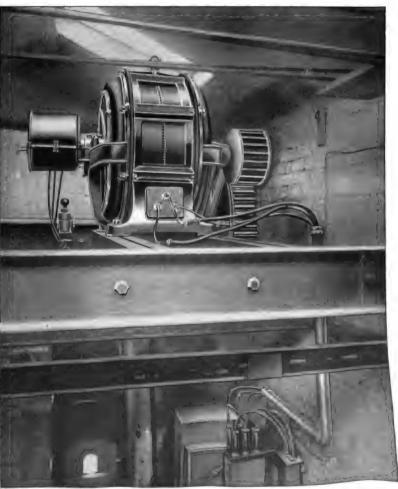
MOTOR GEARED TO SHAFTING FOR GROUP DRIVING.
